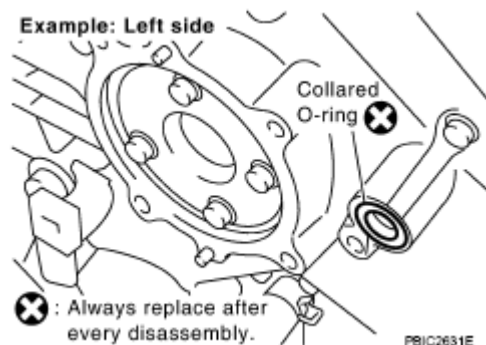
Identifying Collared O-Rings In Front Timing Chain Case Oil Hole
